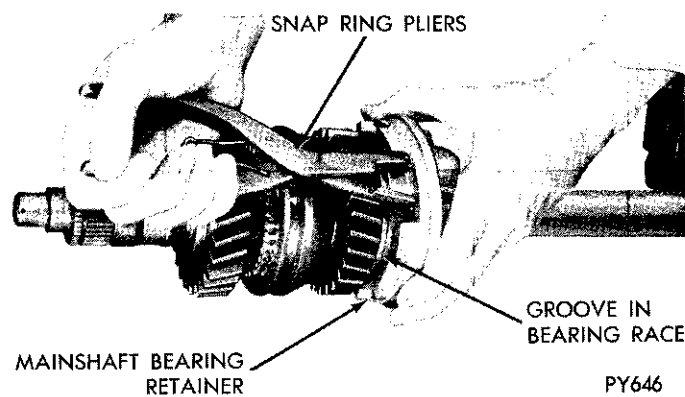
Snap Ring Spread, to Remove or Install Retainer on Mainshaft Bearing
